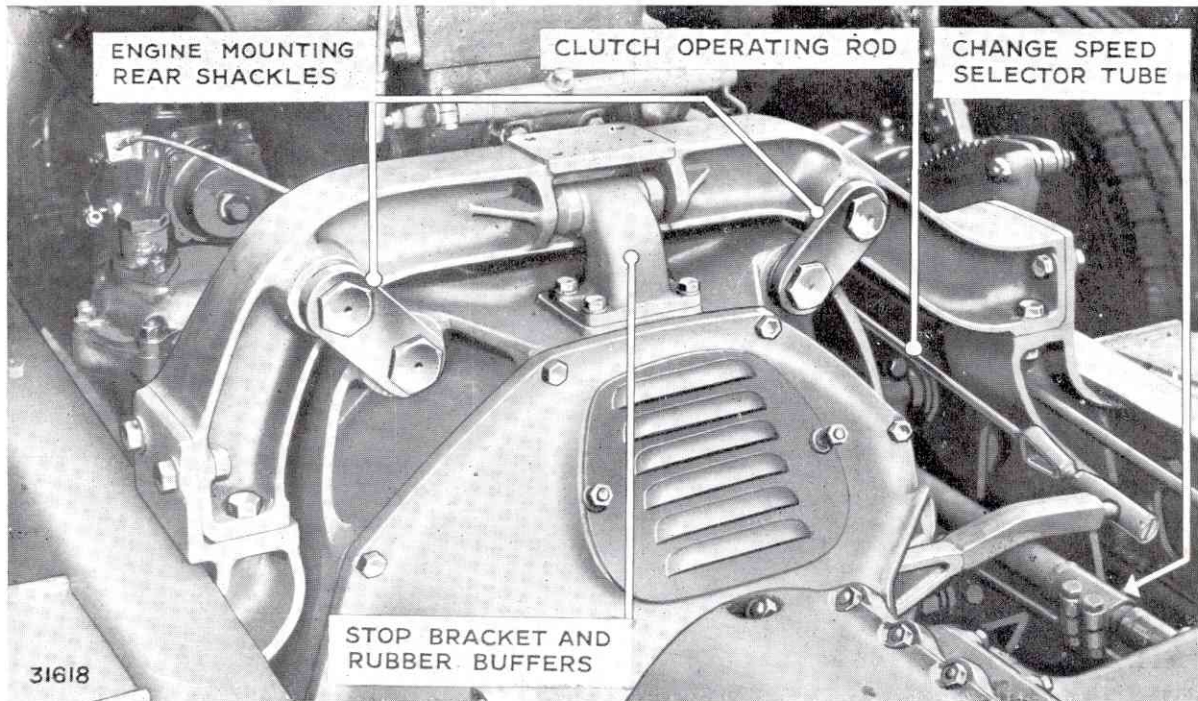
THE CLUTCH HOUSING AND ENGINE REAR MOUNTING ON THE PASSENGER VEHICLE
